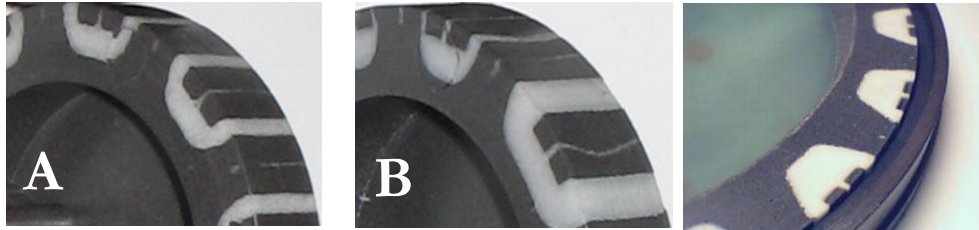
Claw-pole stator cores with SM<sup>2</sup>C: injection molded D1 [5] (left) and rotocasted D2 (right) [9].
